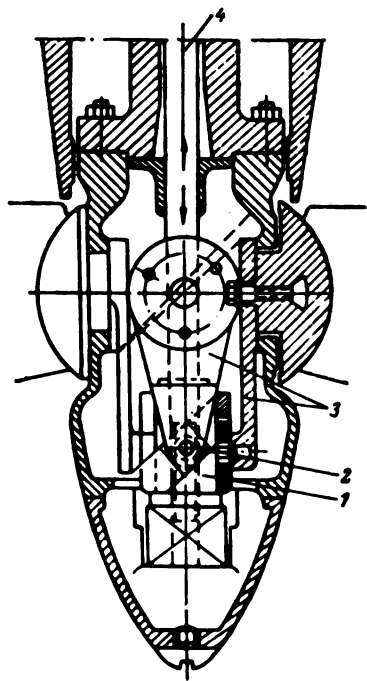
Blade-actuating mechanism with guide blocks and oblique grooves
